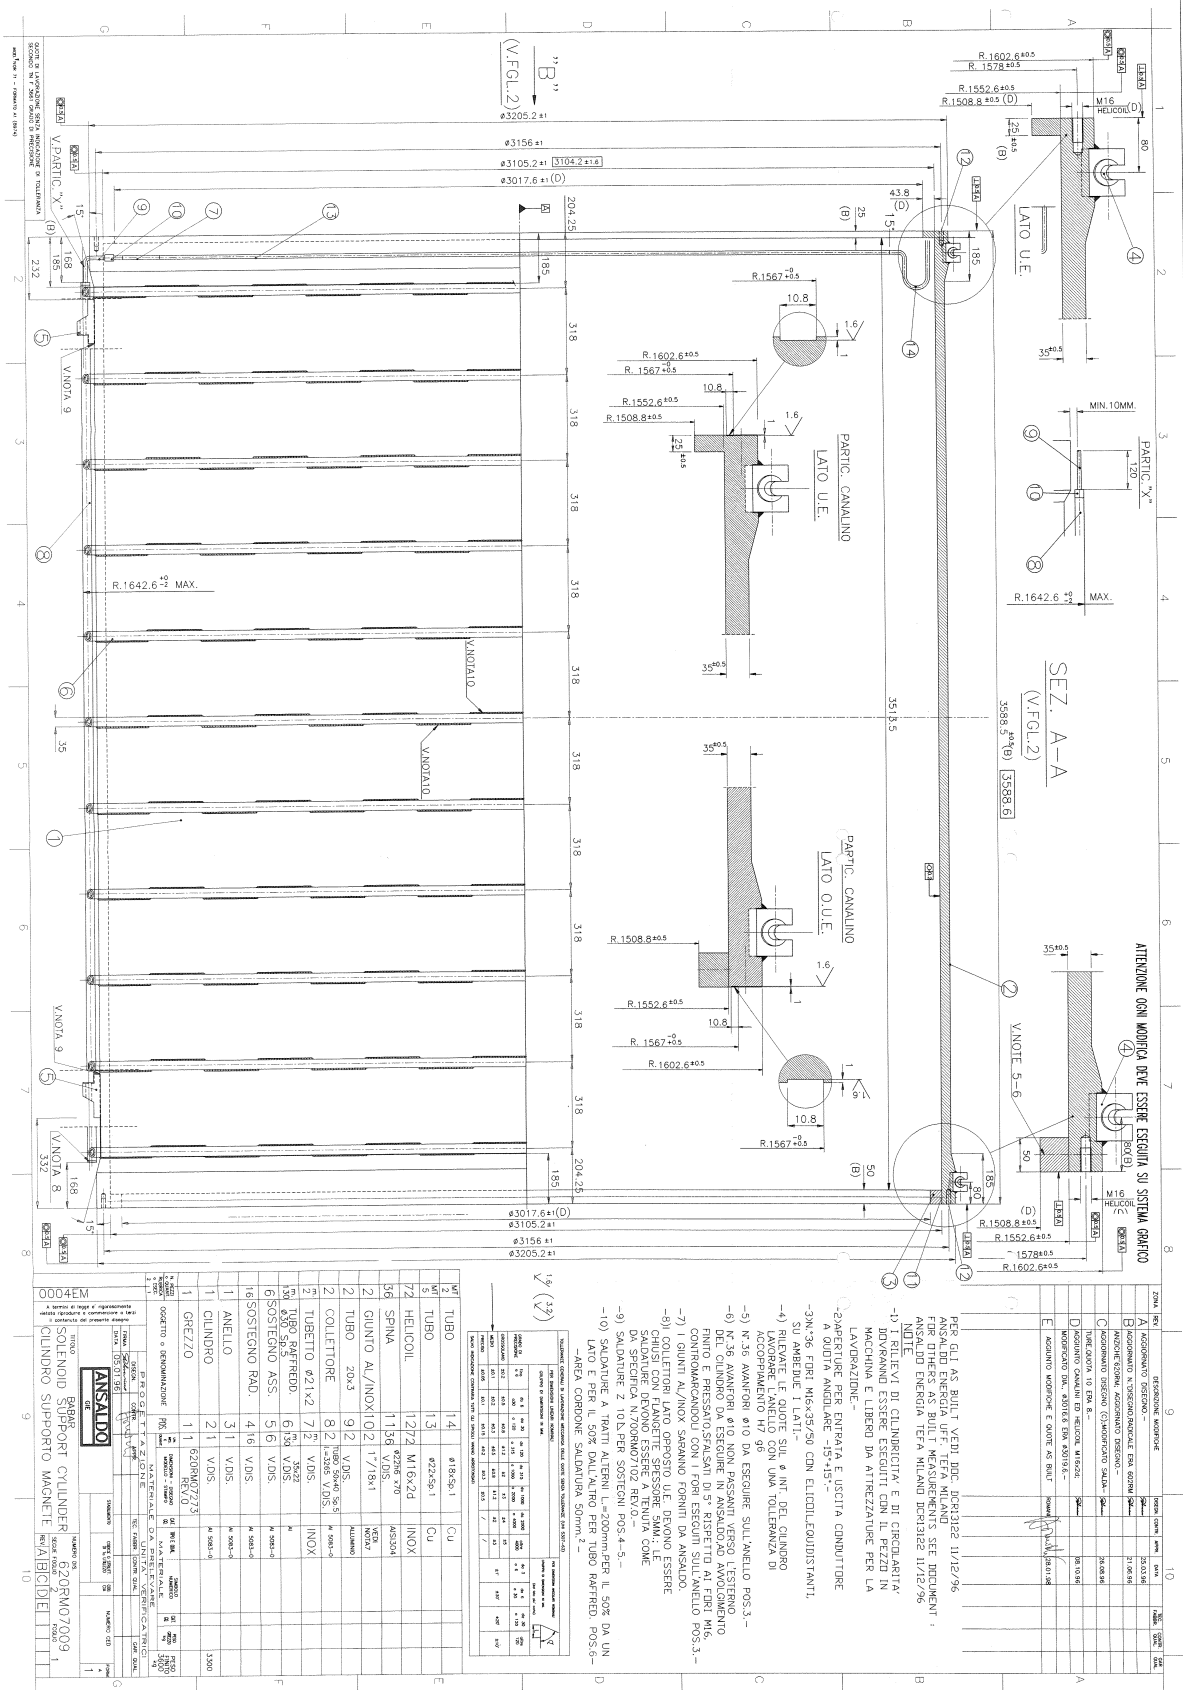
Original Ansaldo drawing of the Solenoid Support Cylinder
